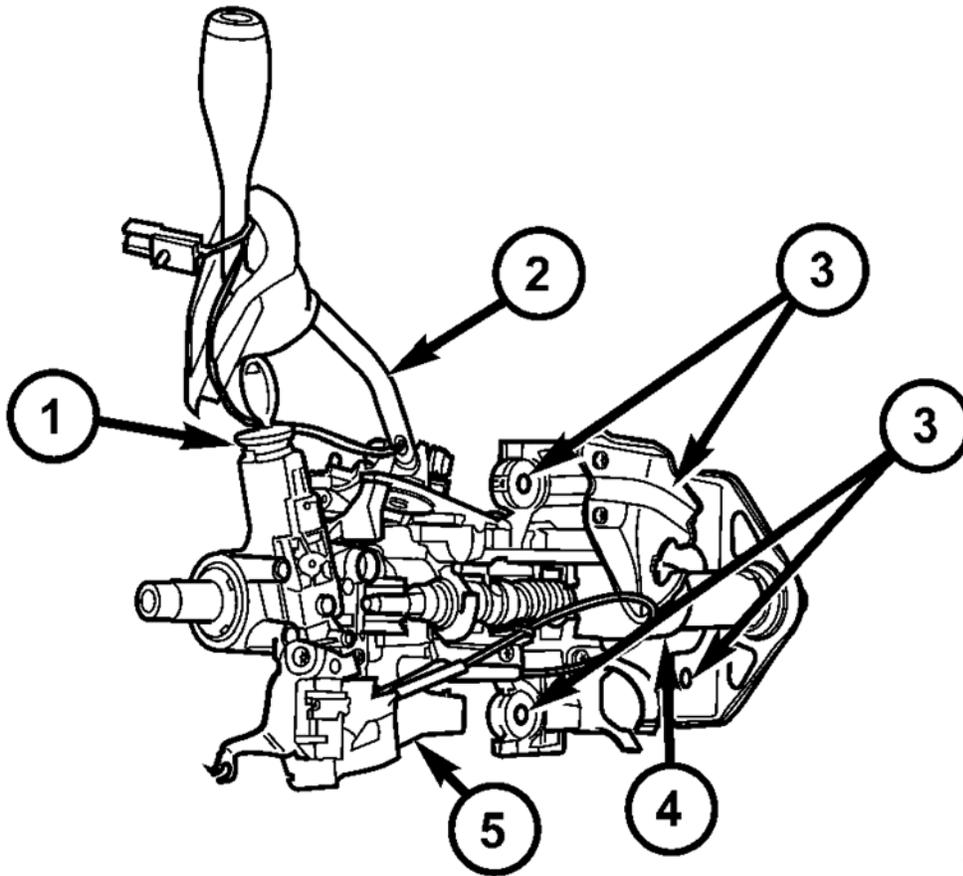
Ignition Switch Mounting Screws & Non-Tilt Mounting Bracket Screws
